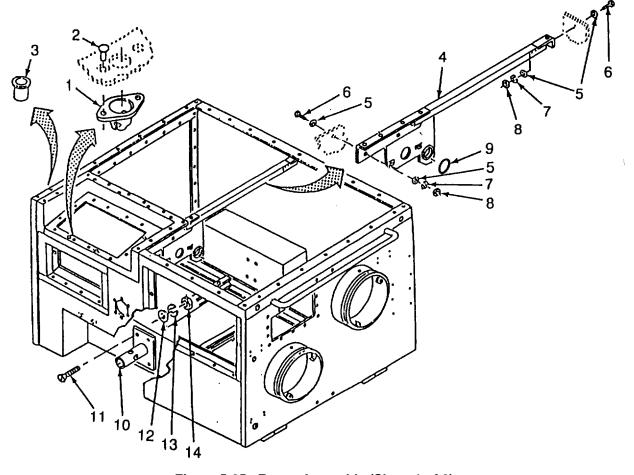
Frame Assembly (Sheet 1 of 2)
